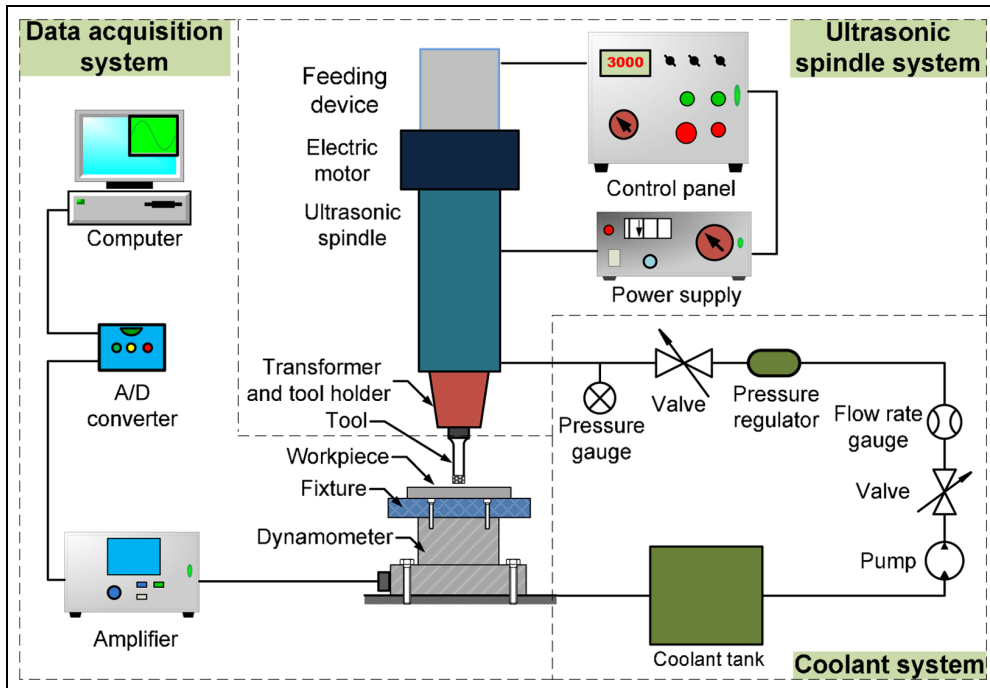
Rotary ultrasonic machining (RUM) experimental setup.
